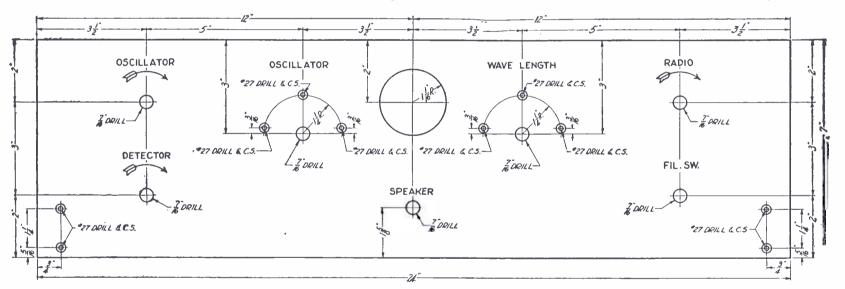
Panel lay-out, showing size of holes to drill, and suggested engraving
